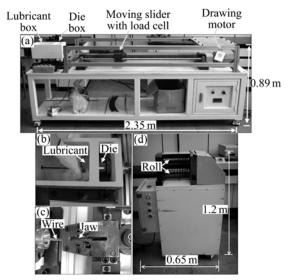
Pilot wire drawing machine to measure drawing force and state of coating layer: (a) Structure of pilot wire drawing machine; (b) Anointment of powder-type lubricant; (c) Operation of drawing machine; (d) Pointing machine
